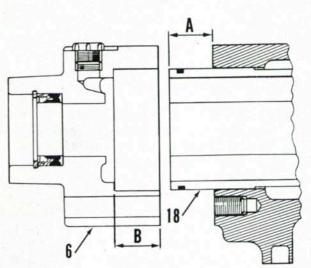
Measure dimensions (A and B) to determine required thickness of steering cylinder tube shim.
